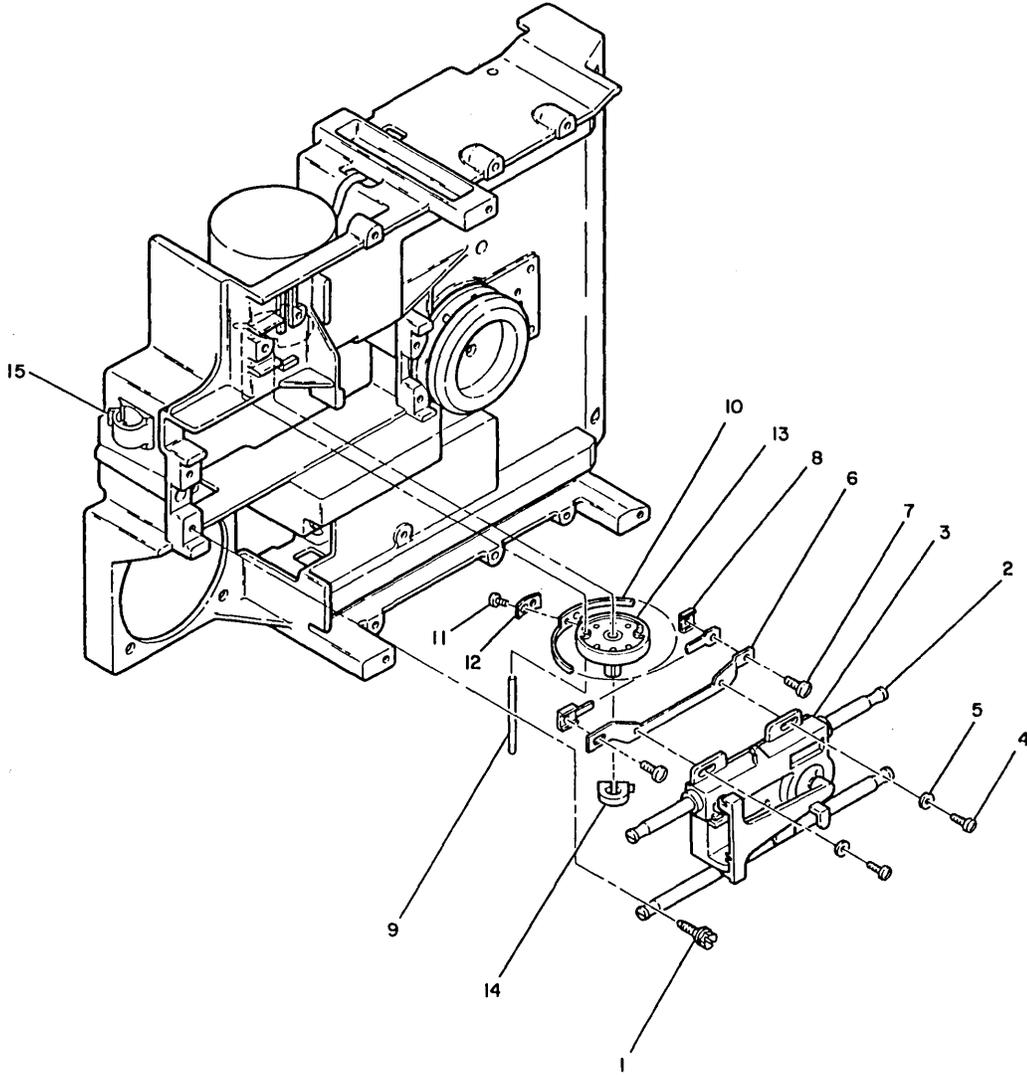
CARRIAGE AND PULLEY ASSEMBLY
